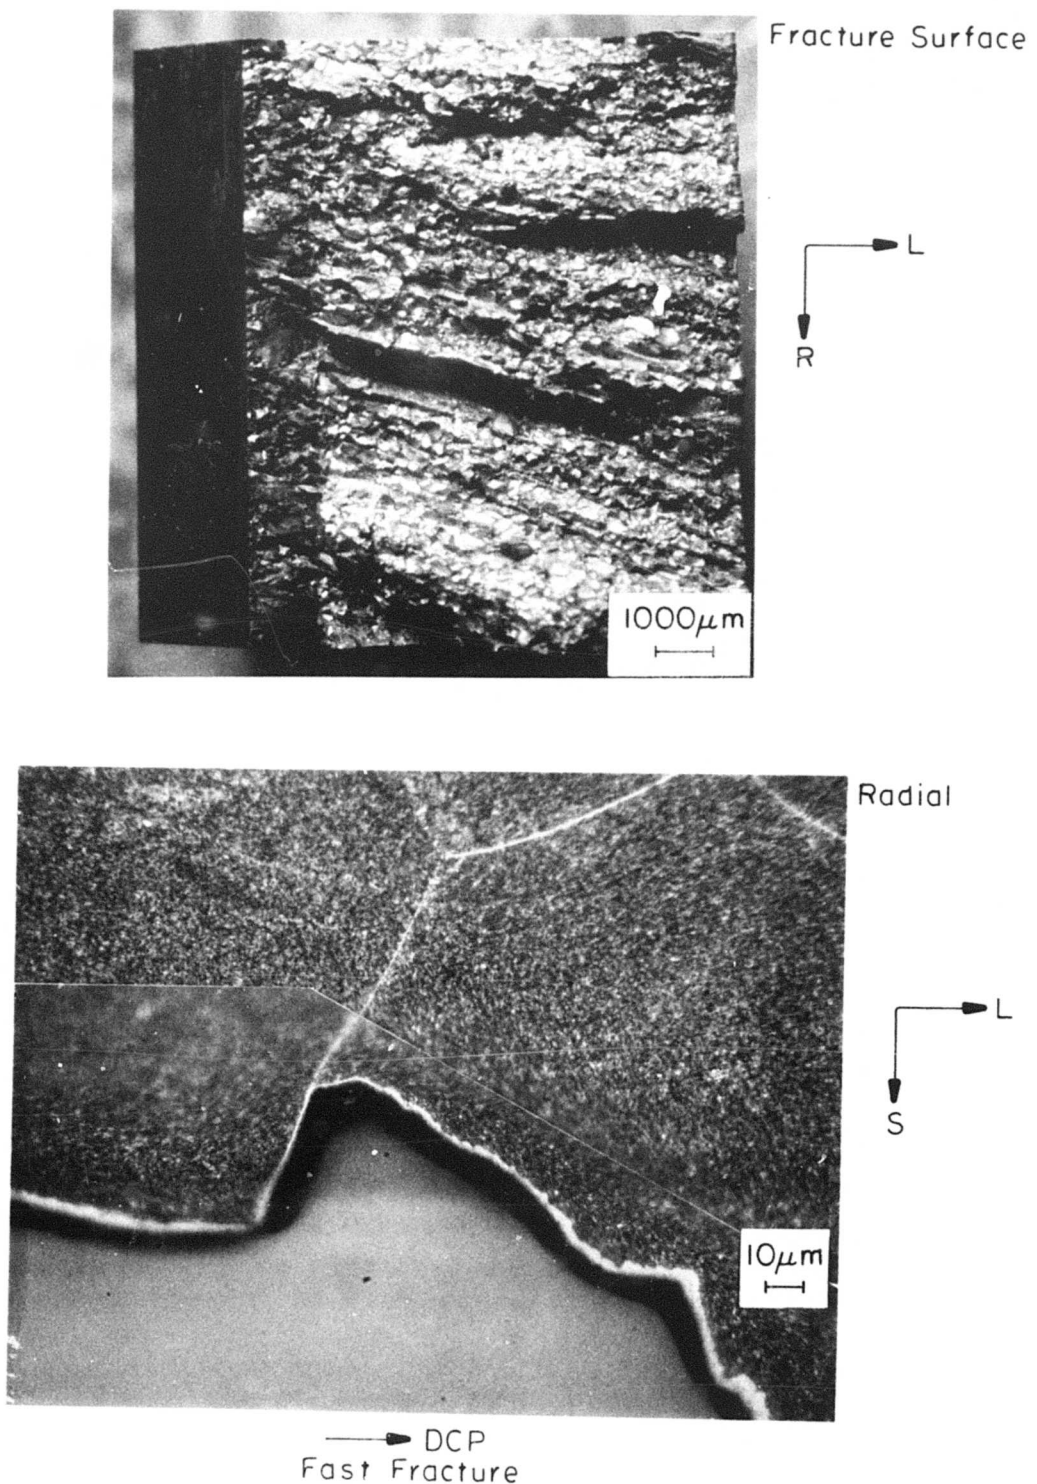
Alloy 334, sample 4MSL8. Fracture surface X8, crack path X500. Note faceted appearance of fracture surface, mixed mode transgranular/intergranular crack propagation.
